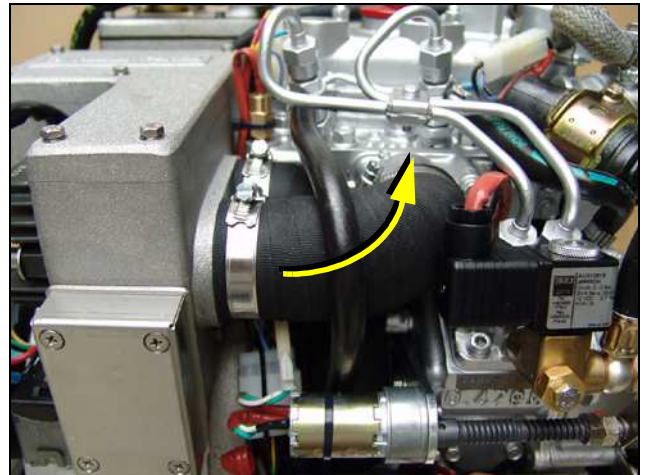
Combustion Chamber Intake Elbow
